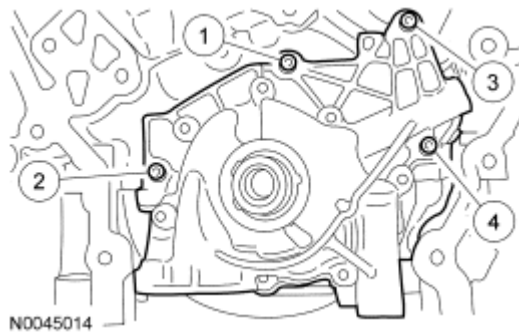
Identifying Tightening Sequence Of Oil Pump Bolts
